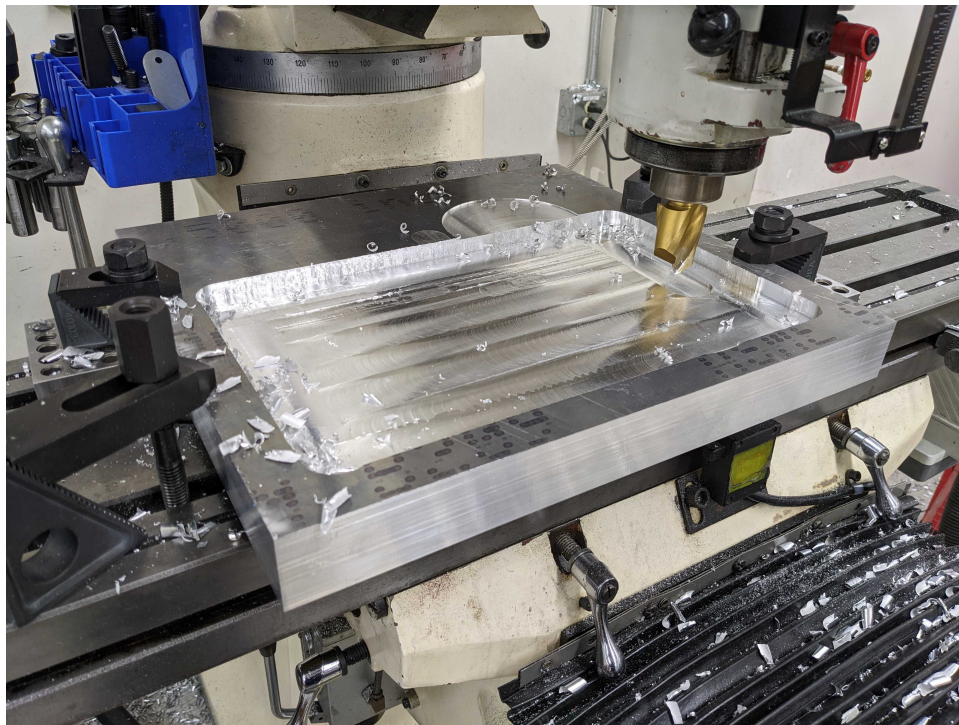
Milling of the aluminum lid for the full-panel assembly.
